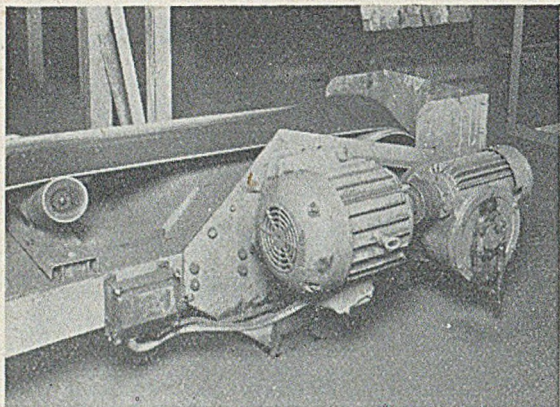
Standard Driving Unit for Sand Belt Conveyors.
